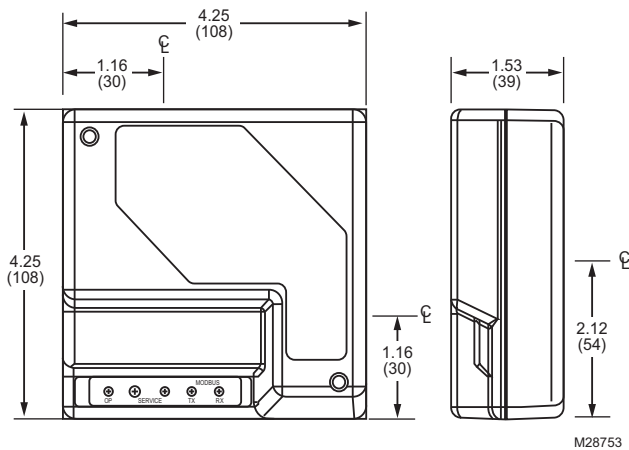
Dimensions of SXBC-1 in in. (mm).
